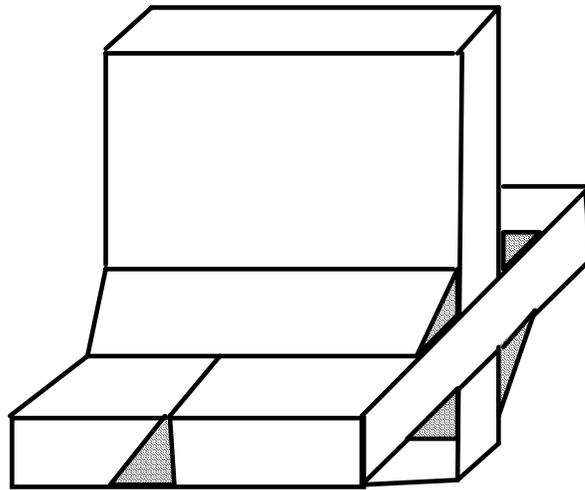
A combined weld is a mixture of fillet and butt welds.
